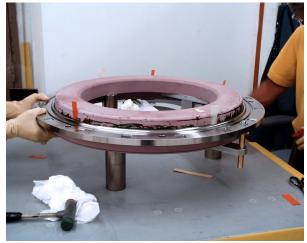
Using lab jacks to raise and lower the slip flange onto the casting (both left and right).
